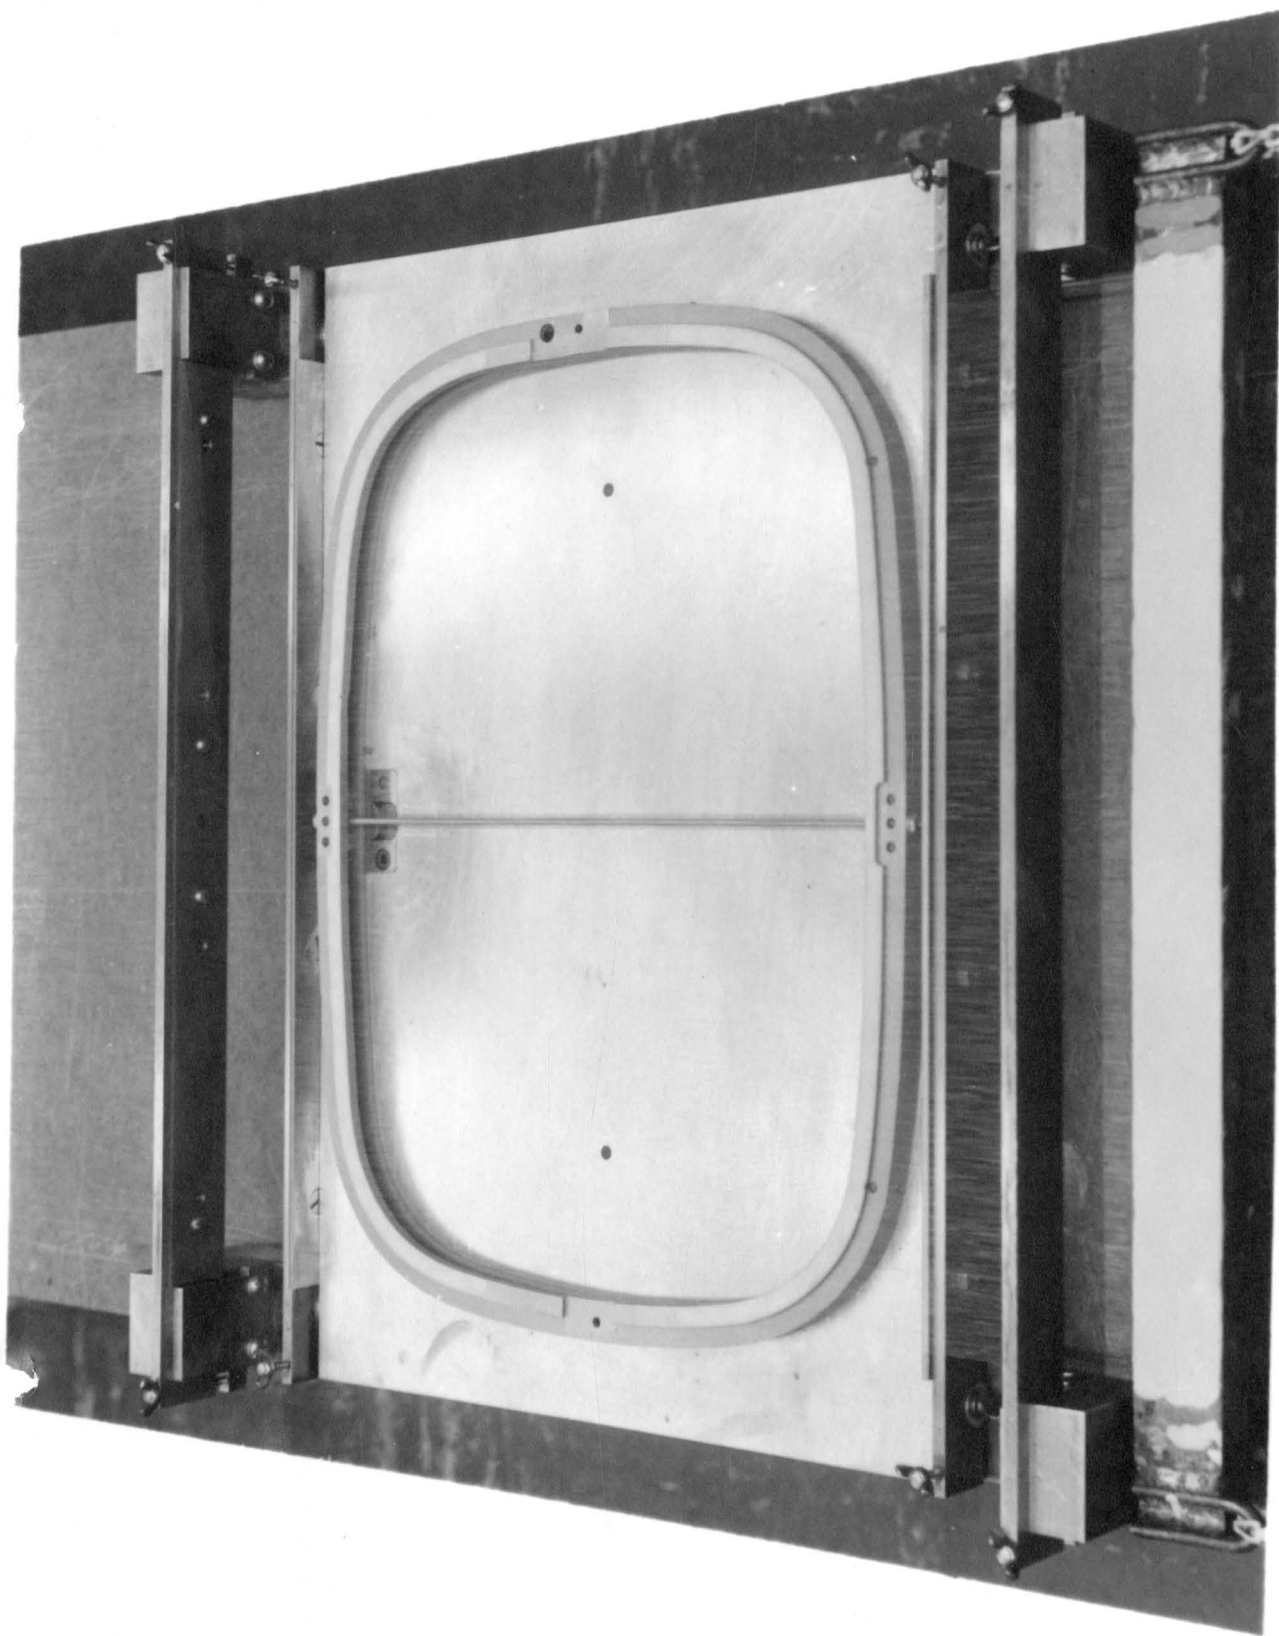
GRILLE TO FRAME FASTENING JIG.
